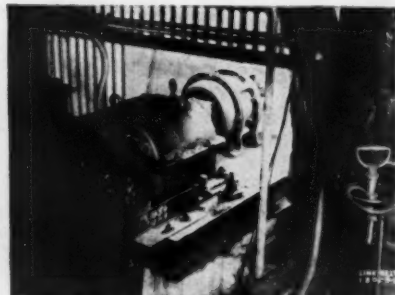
One of three 5-hp. Herringbone speed reducers and roller chain drive (in casing) to headshaft of apron feeders at the ore screening plant.
